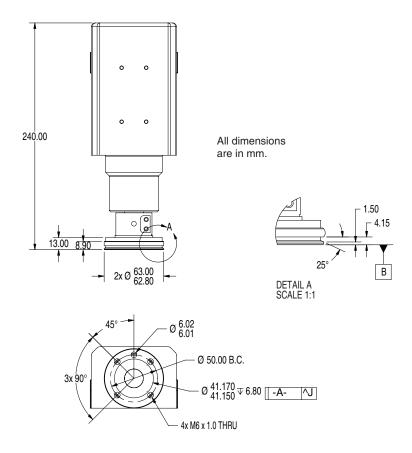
LT1 (Theta) Module User Flange Dimensions
